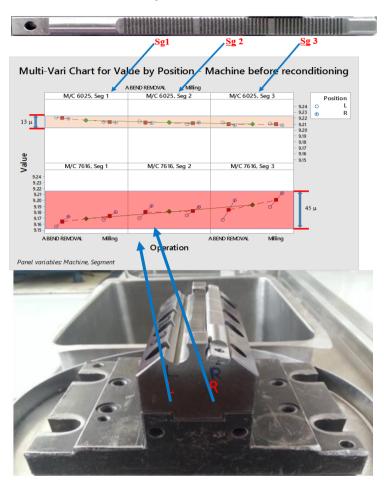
Dismantled fixture of defective machine (7616) – front profile view Report of the fixture measurement from CMM
